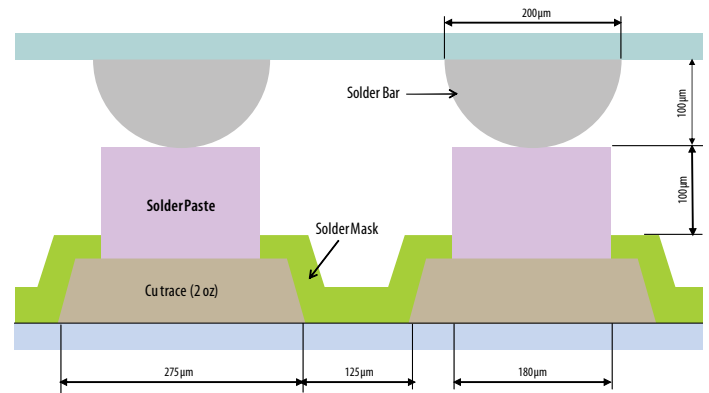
Schematic cross-sectional view of a die placed on a PCB with a stencil-printed solder paste.
